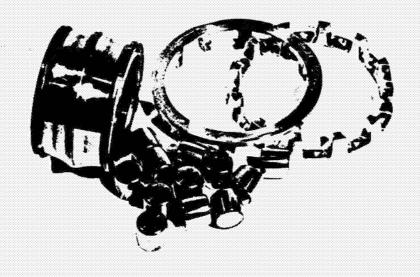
SPHERICAL ROLLER BEARING WITH A SP., IT CAGE
